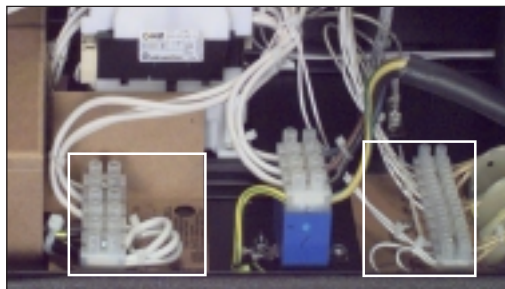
Connecting terminal plate for welding and control transformers
